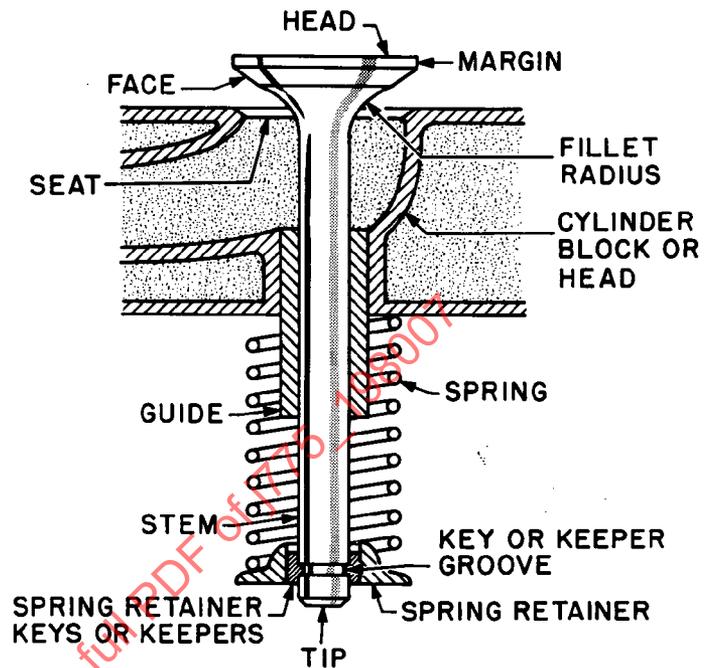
VALVE ASSEMBLY NOMENCLATURE
